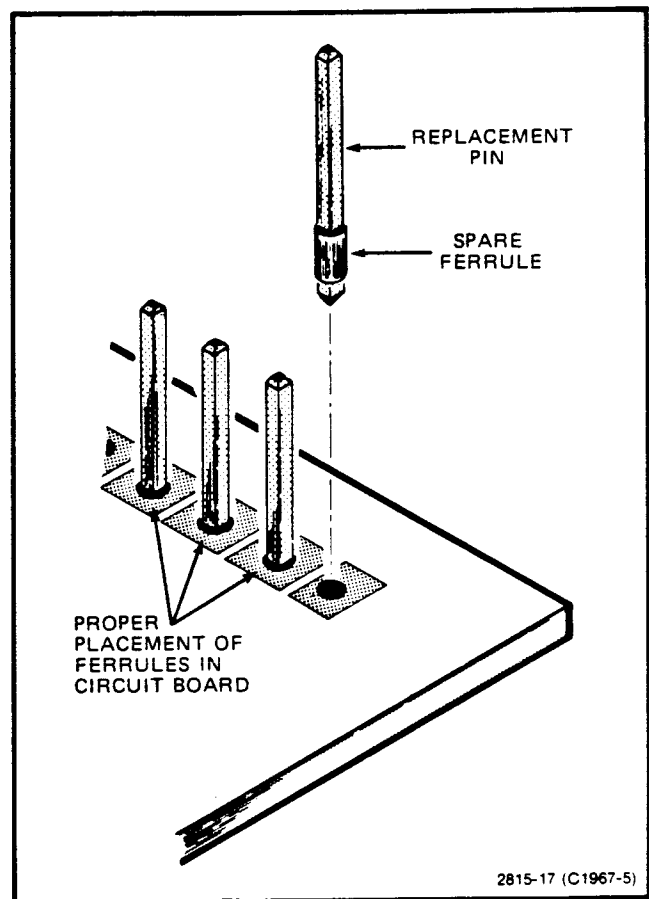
Exploded view of circuit board pin and ferrule.
